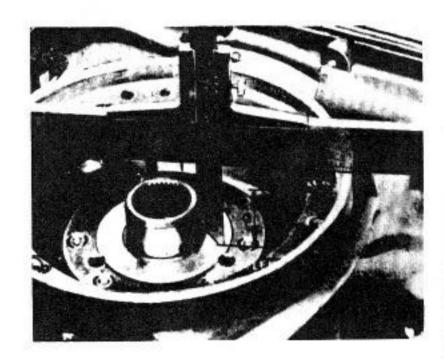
Dimension a. For this measurement the gasket between the transmission case and the gear-set bearing flange must be in place on the sealing surface. Dimension a is the distance from this gasket to the planetary gear carrier. In this first step, use a depth gauge to measure the distance from case rim to planet carrier.
